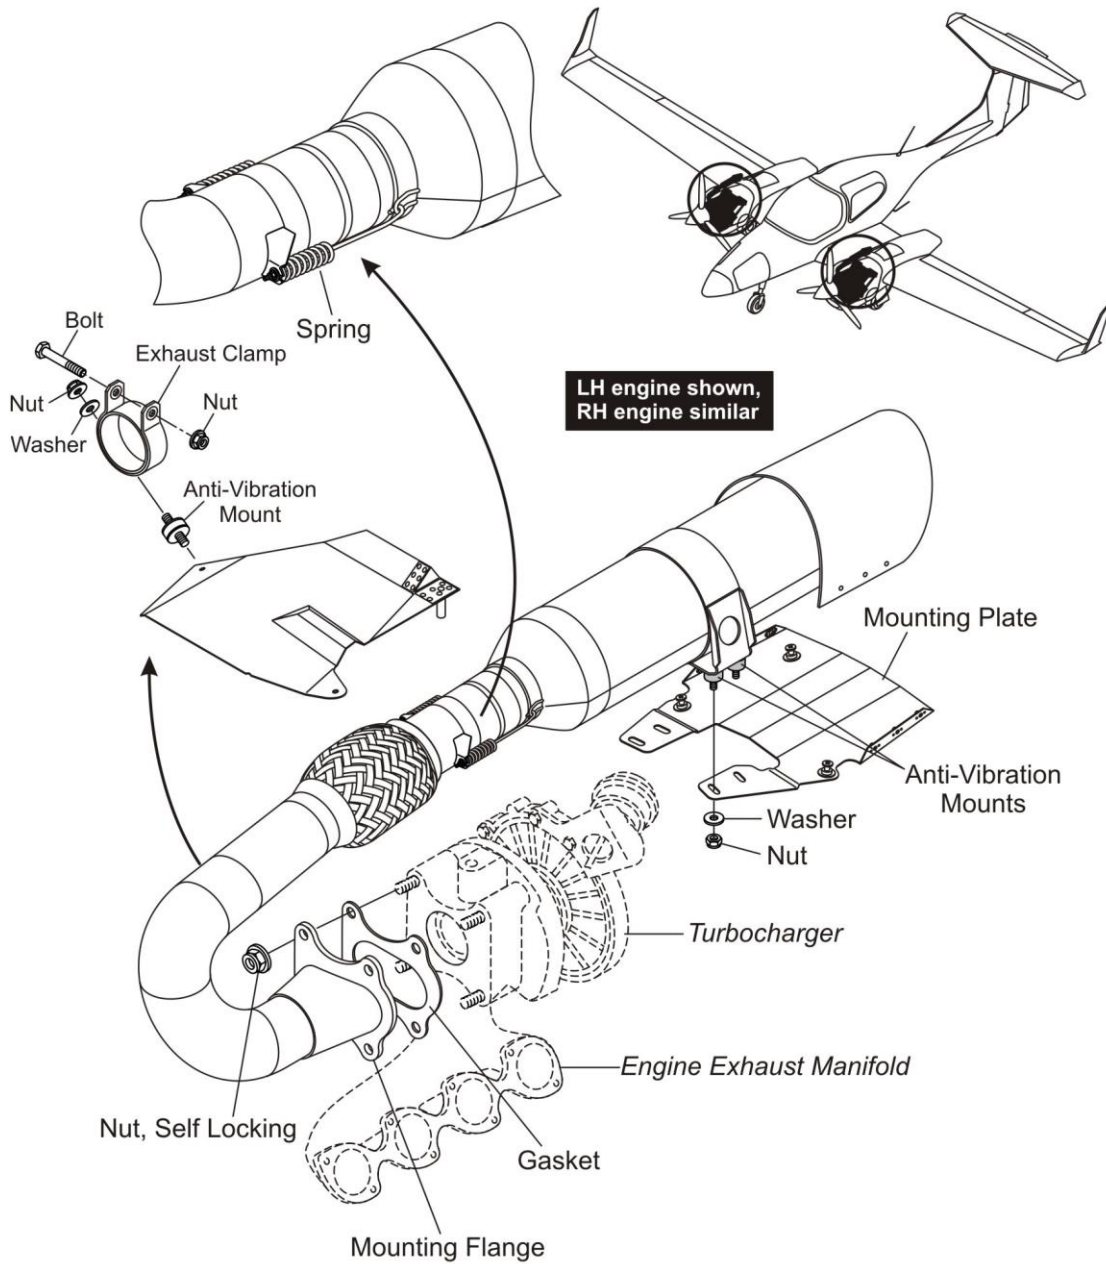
On Top Exhaust System Installation (OÄM 42-173/v through OÄM 42-173/y), Exhaust Tube Part Number: D65-7806-10-00\_06
